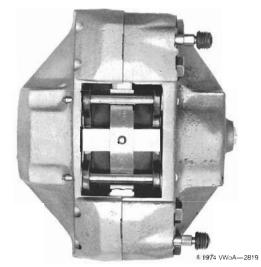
Latest brake caliper. Introduced on the 1973 models, it is larger than the earlier types.
